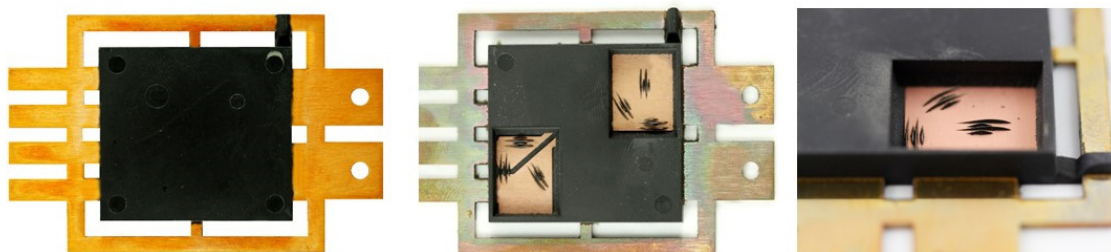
Molded package after the molding process (left), opened molded package to expose the wire bonds which are bonded on two locations on the lead frame (middle), wire bond groups close to the gate (right)
